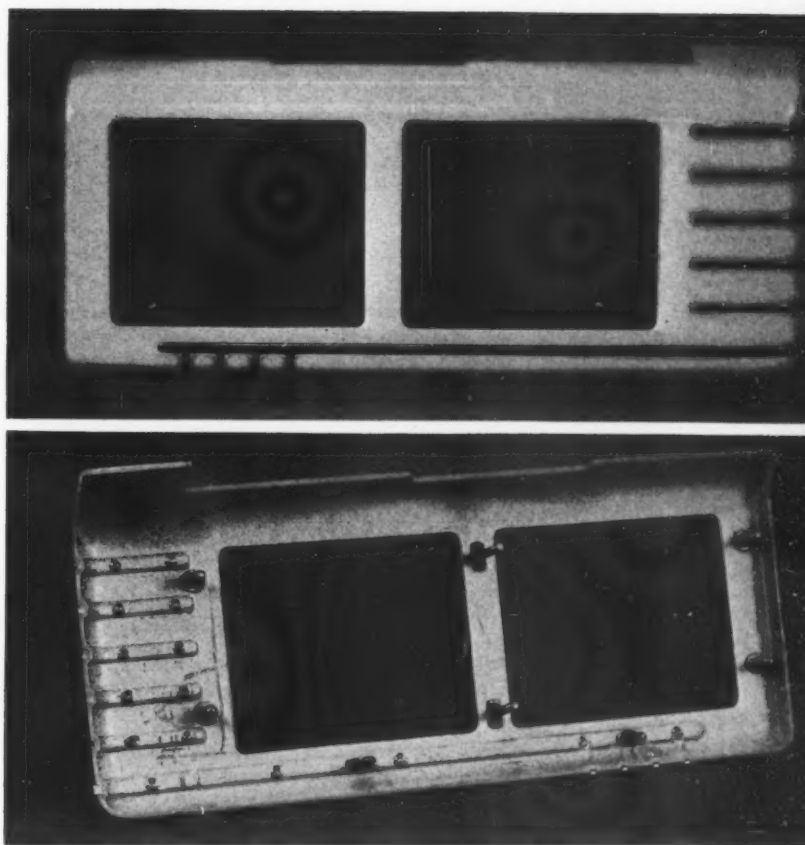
Automotive instrument panel would be more satisfactory if molded of thermosetting urea instead of using metal stamping as insert with injection-molded plastic covering it. Bottom view shows back
